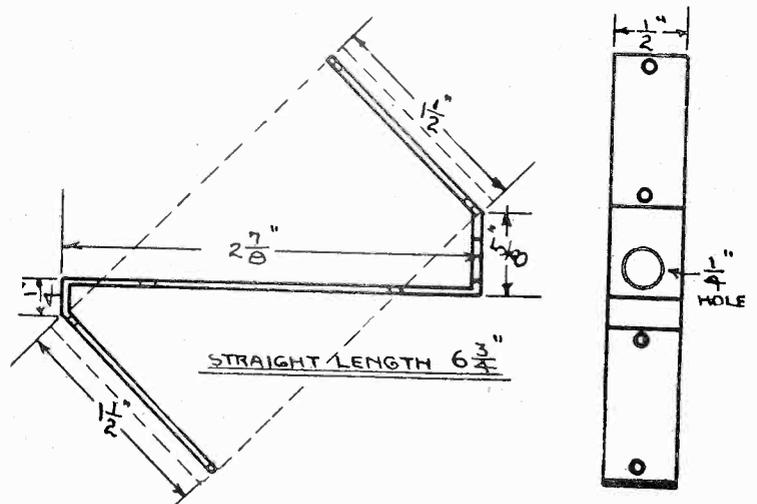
The standard for the rotor which is bent out of heavy brass strip, and makes possible the 180° coupling.
